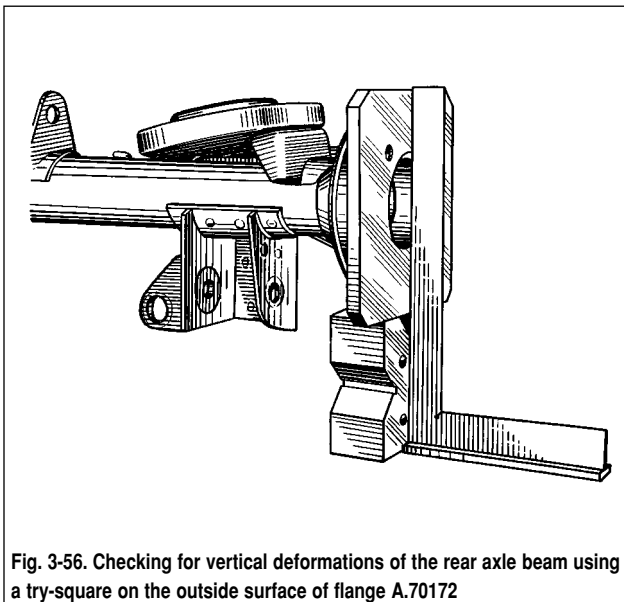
Checking for vertical deformations of the rear axle beam using a try-square on the outside surface of flange A.70172
